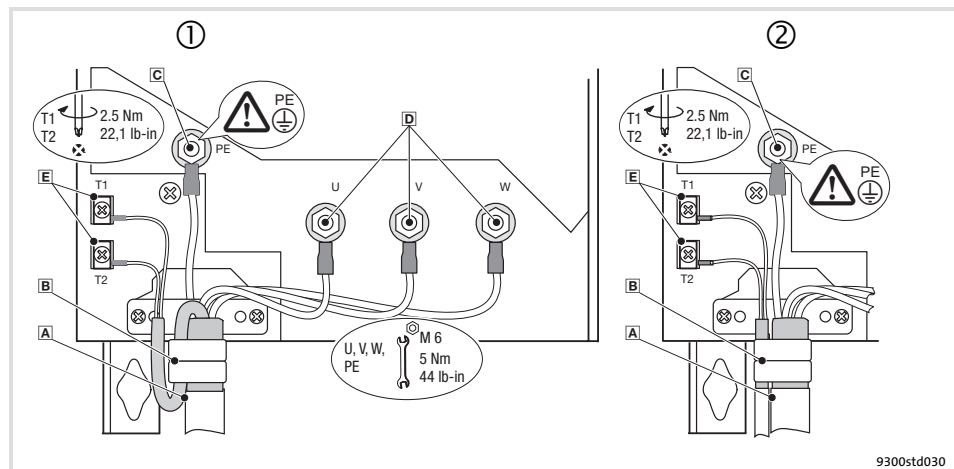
Motor connection with PTC thermistor or thermal contact (NC contact)
